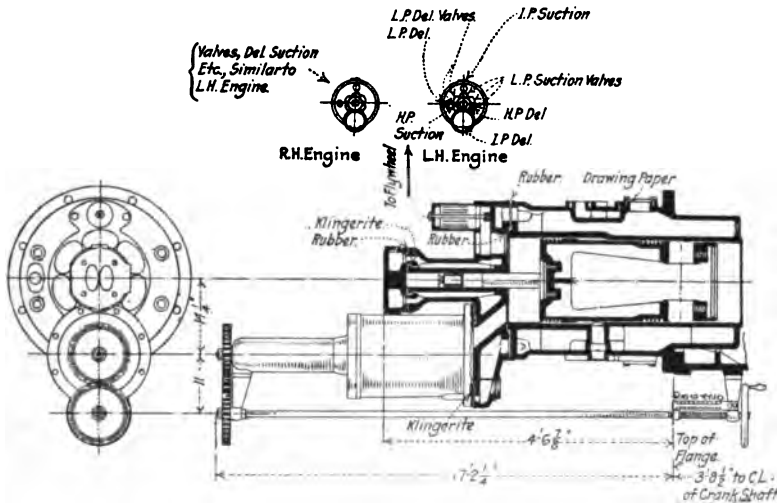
McIntosh & Seymour marine Diesel air compressor.
